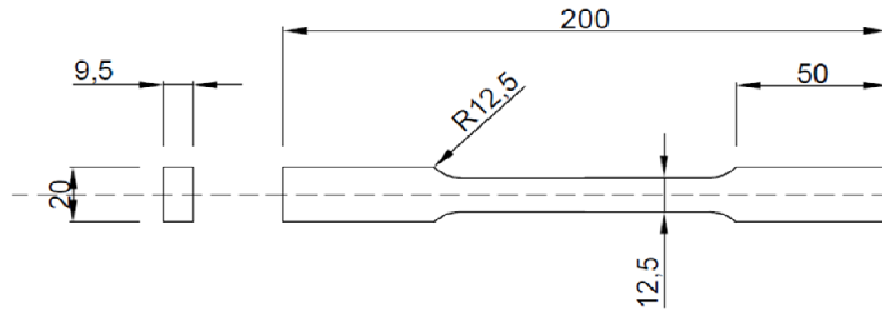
Tension coupon for static material testing (dimensions are in mm)
